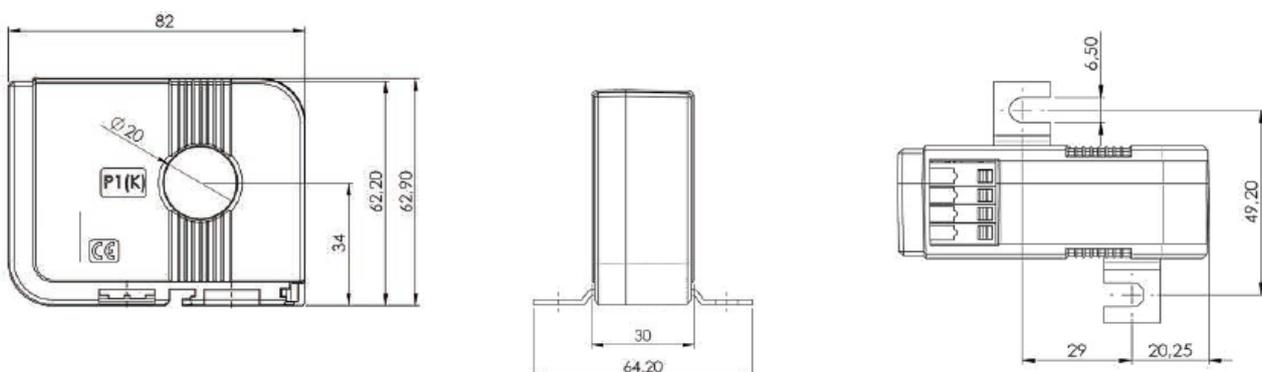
SCT4116-0025 dimensions, all dimensions in mm
